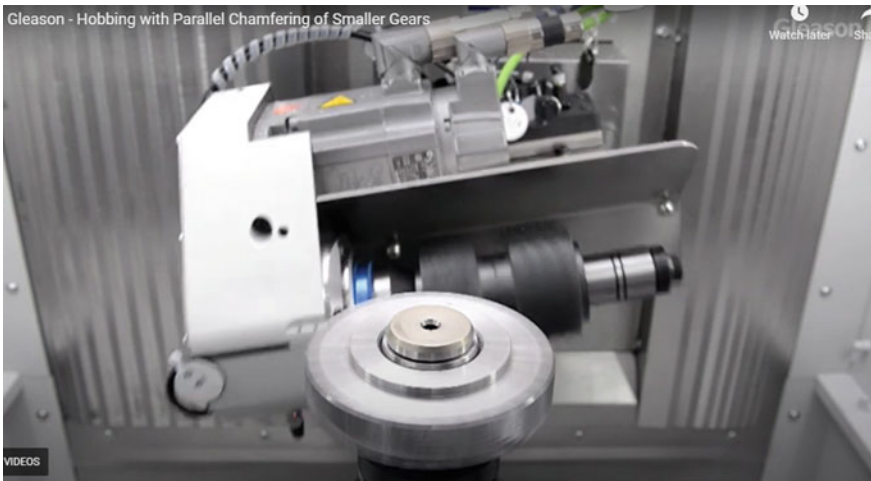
Gleason secondary Toe and Heel chamfering of a cylindrical gear
